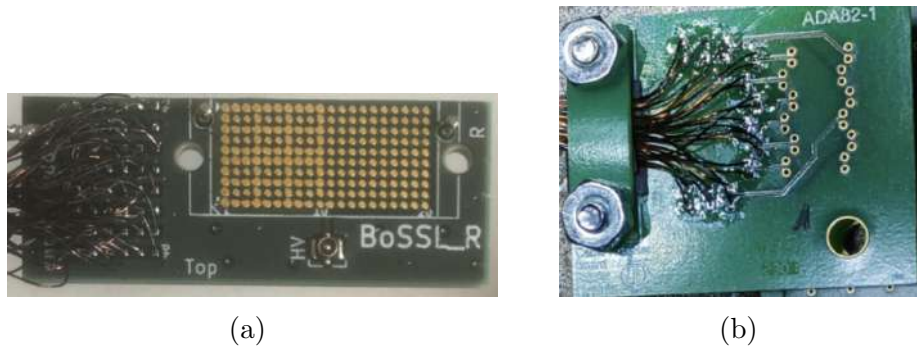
(a) BossL-R Adapter Board (b) DAB-STP Adapter Board
